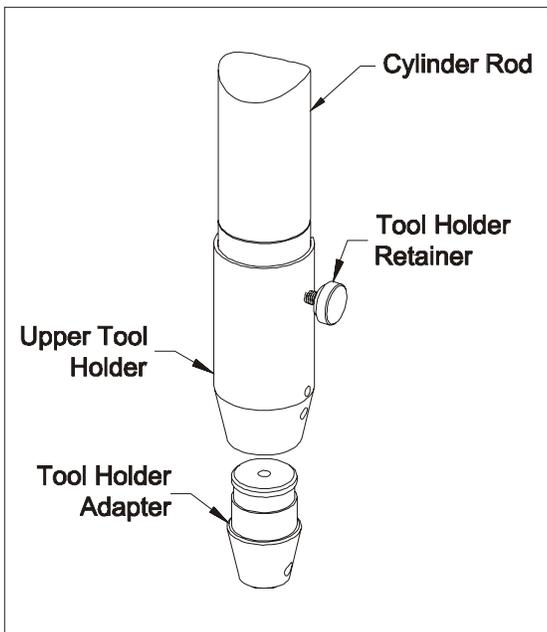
The Upper Tool Holder comes installed in your Hardware Insertion Machine.
